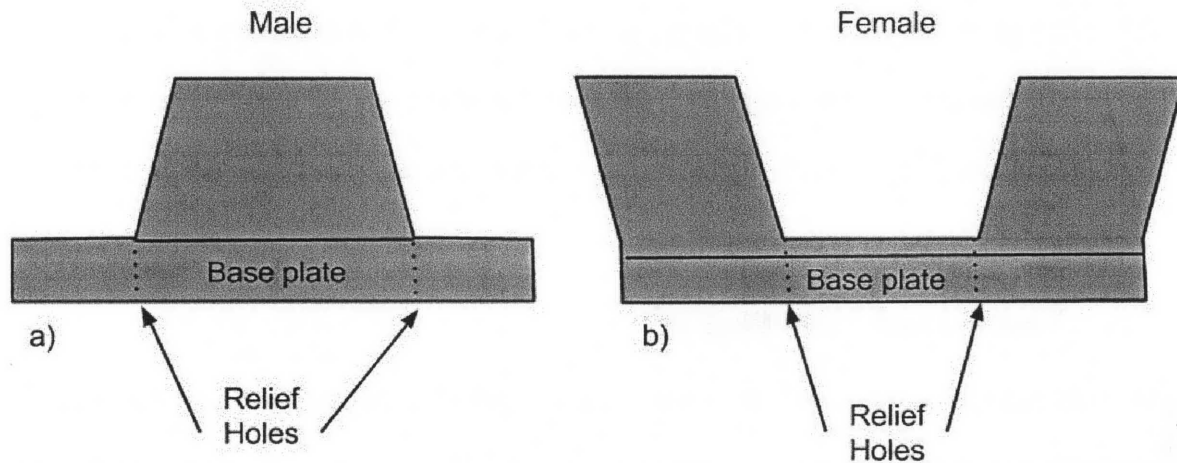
a) Male mold with relief holes and base plate b) Female mold with relief holes and base plate
